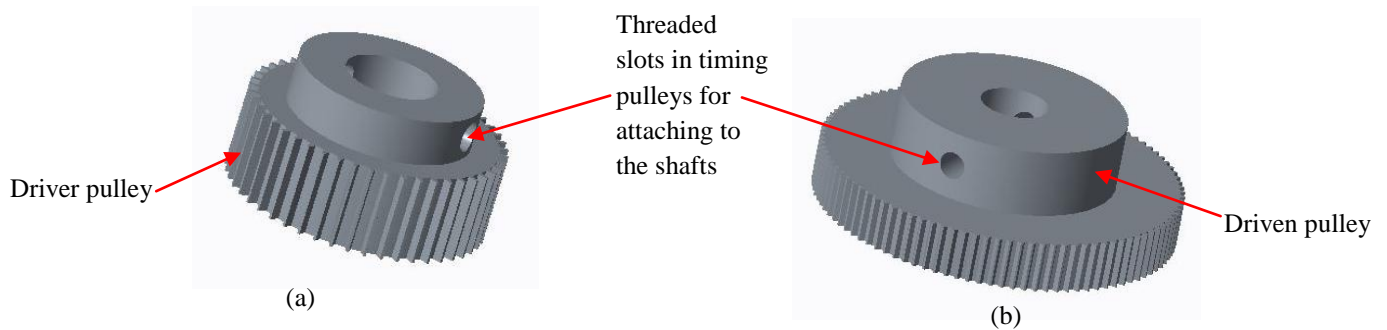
Three-dimensional computer-aided design (CAD) model of (a) driver timing pulley and (b) driven timing pulley used for rotating the magnetorheological honing tool.
